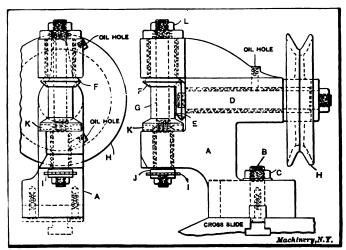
Slotting Attachment held on the Rear Cross-slide
